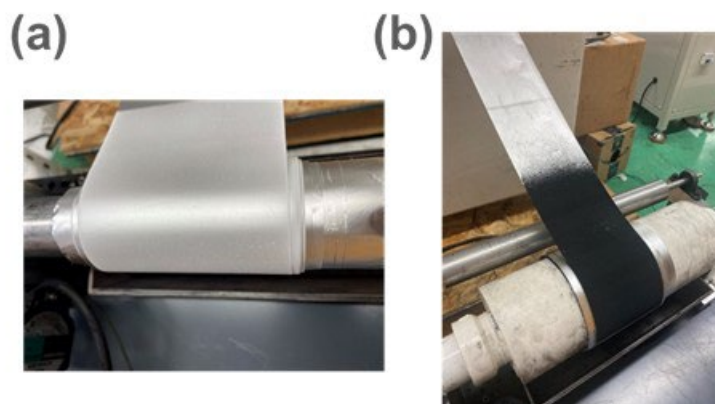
(a) PVDF coated foil roll (b) cathode materials coated foil roll with target loading collected at the winder after final rolling
